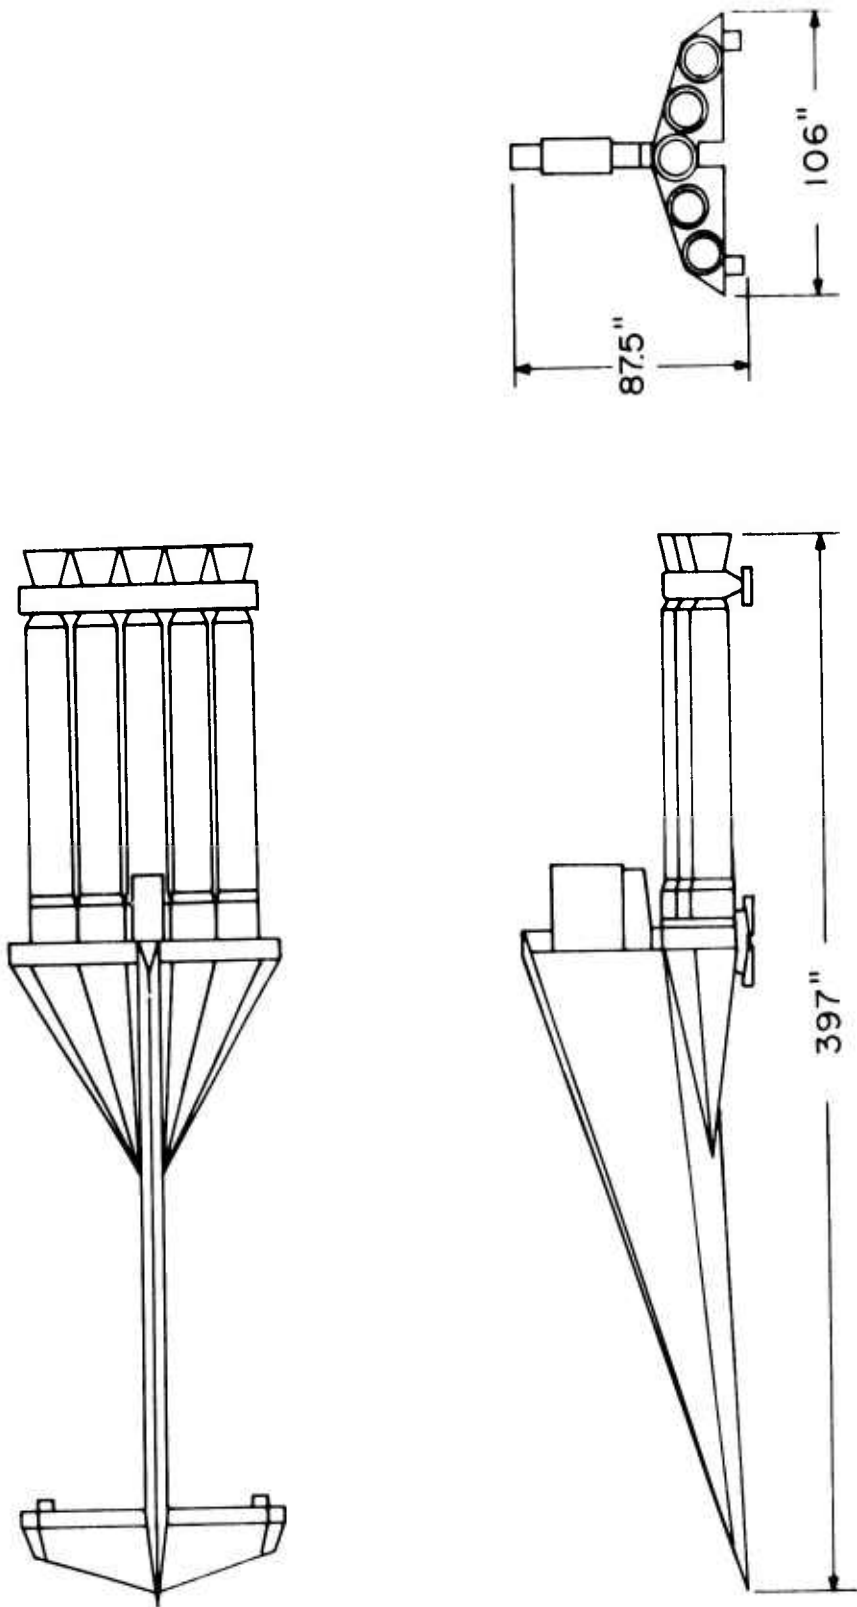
Basic Dimensions (3 View) of the Arrowhead Sled.
